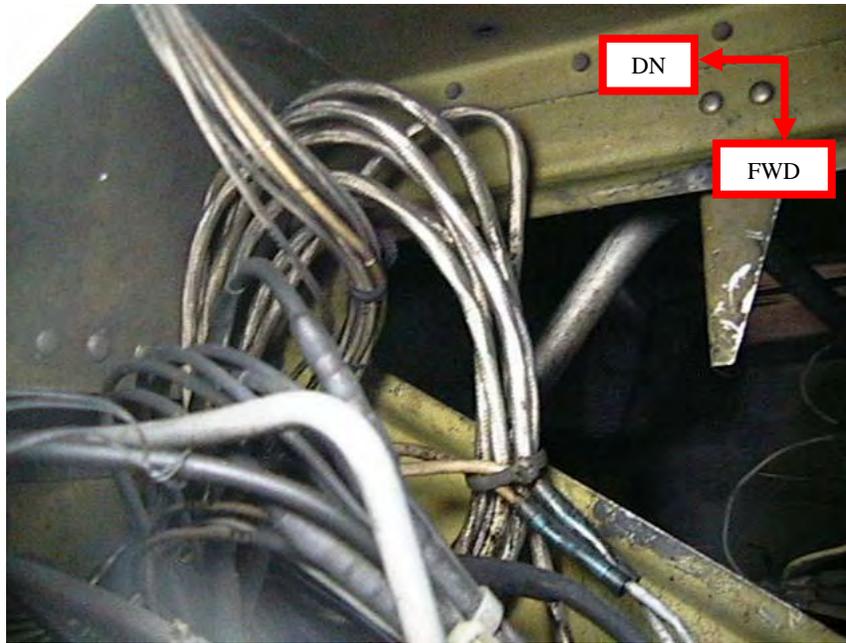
Insufficiently Stowed Wires FS 110, WL 6, and LWS 62
